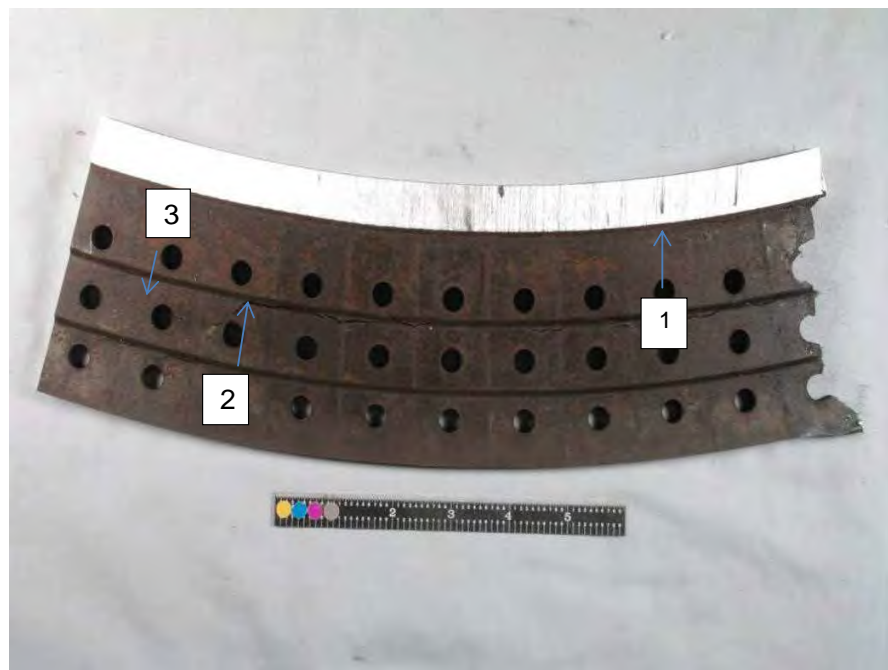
SID 14875 subsegment "C4" finger pinned blade attachment showing location of three examined cracks, viewed from inlet side.
